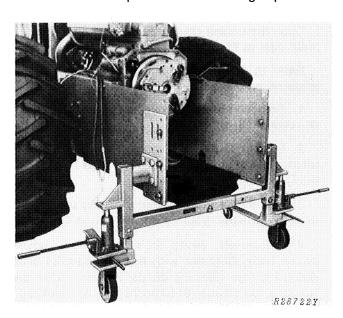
Engine and Tractor Front End Separated From Clutch Housing
